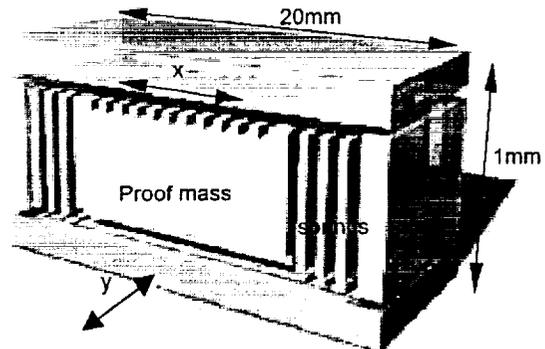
Cutaway drawing showing the geometry of the sensor.
